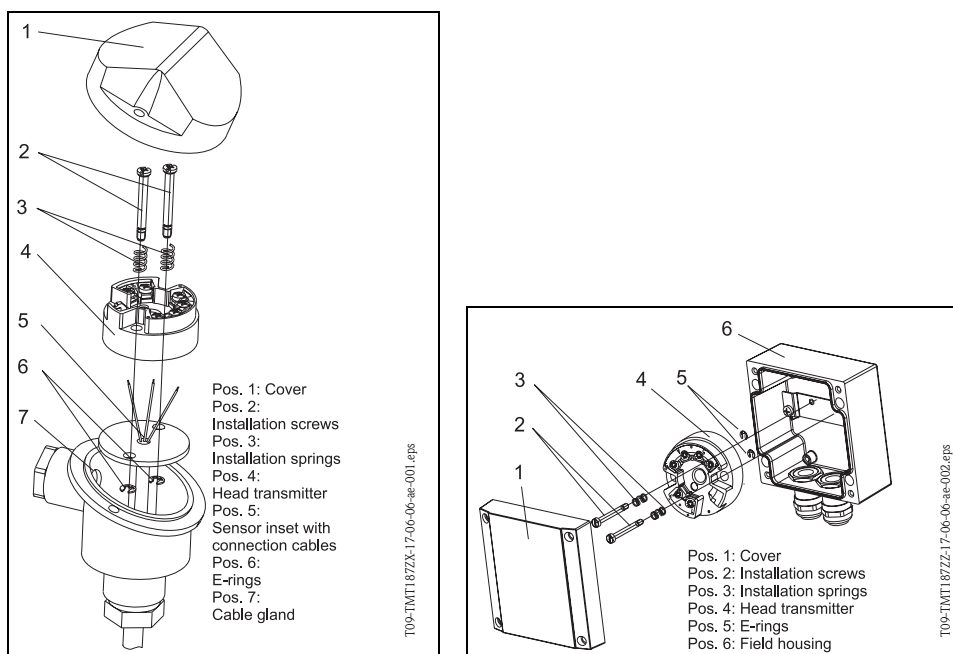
Installation of transmitter into a sensor connection head (left side) and a field housing TAF10 (right side).
